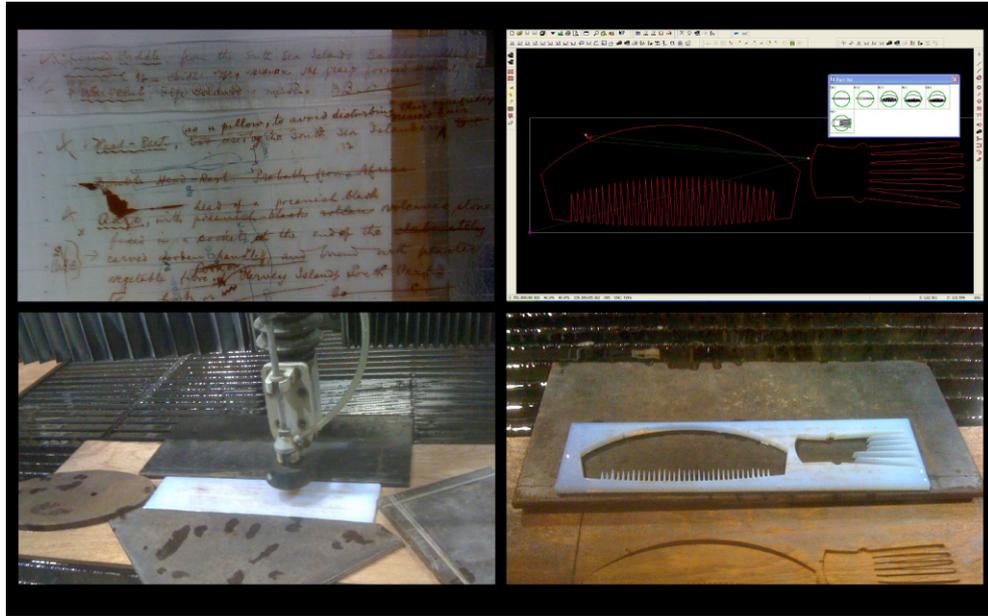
Process: printed and cut text on glass, CAD drawing of comb, waterjet cutting shape, remnants from cutting.
